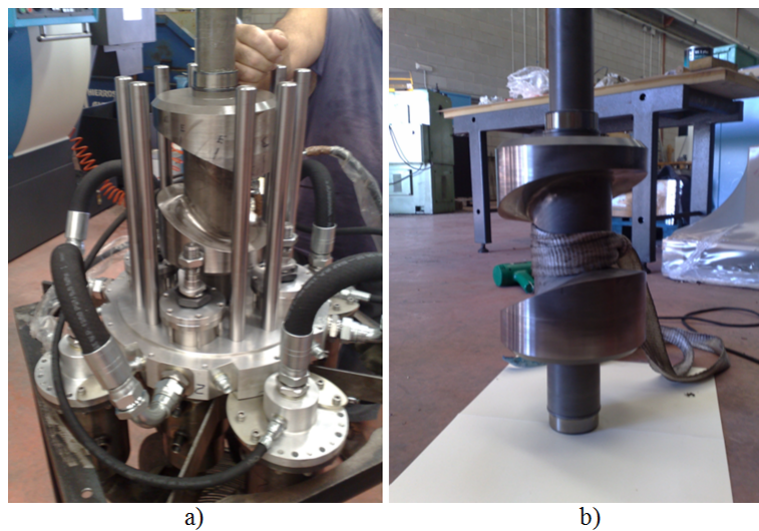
Photos of the shaft of the transmission mechanism. a) shaft supported on the structure of the medial motor. b) insulated shaft
